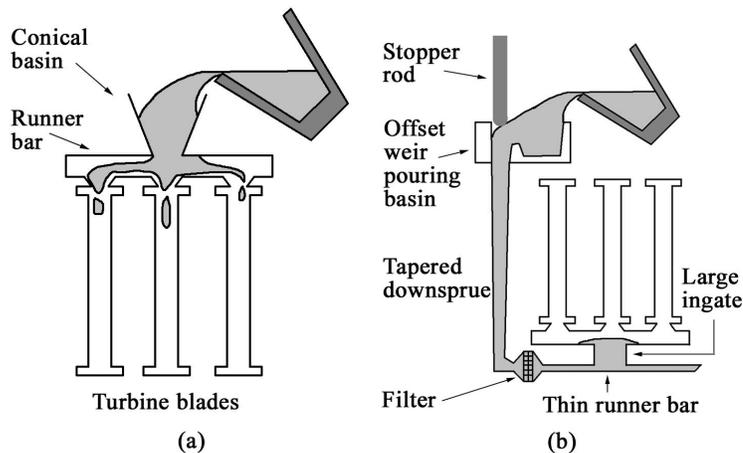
Schematic mould designs for casting turbine blades using (a) top-gating and (b) bottom-gating.
